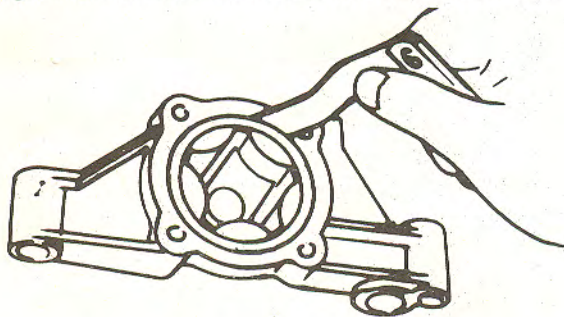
Checking the clearance between the outer rotor and the pump housing bore with a feeler gauge.
